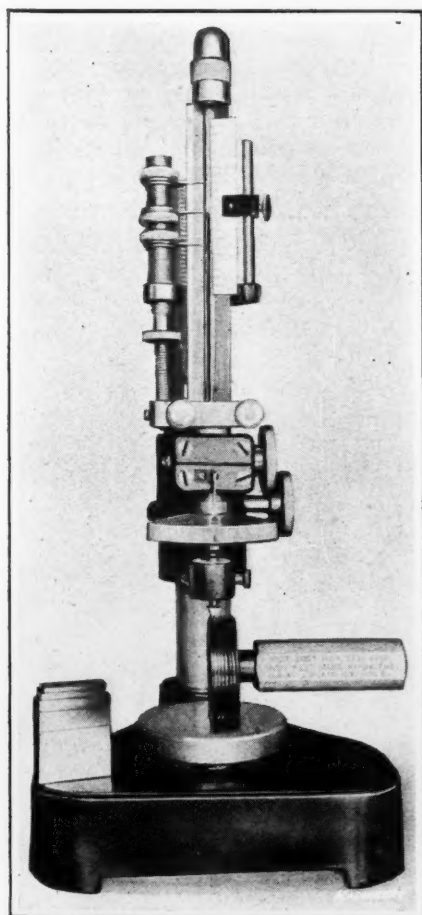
Pitch Diameter Measuring Machine built by Blair Tool & Machine Works
